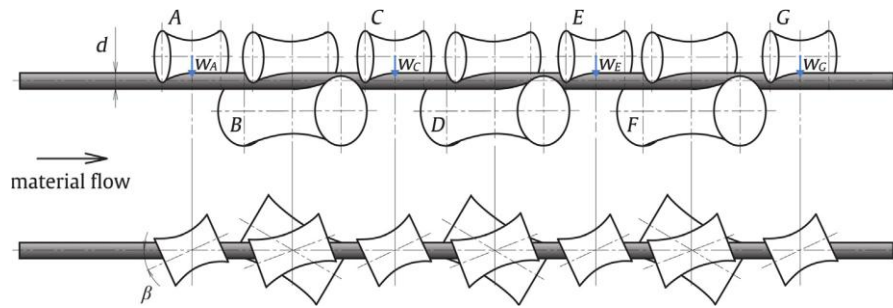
Schematic Diagram of a Typical Multi-Roller Straightening Machine [52]
